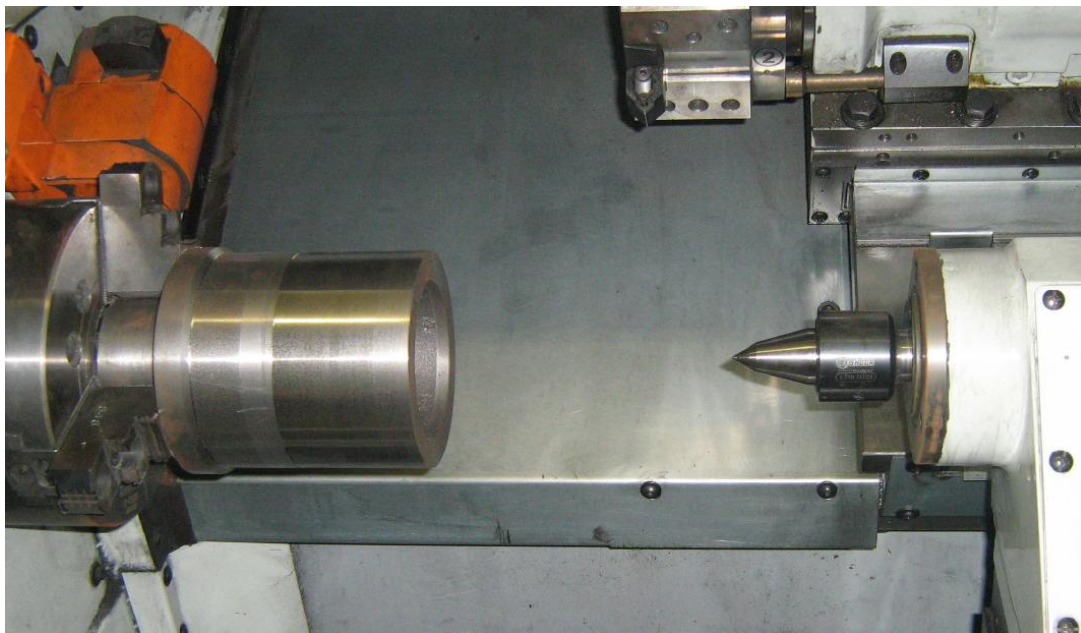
CGI workpiece (left) held within the chuck jaws as well as tool holder (top) in the setup used for turning tests.
